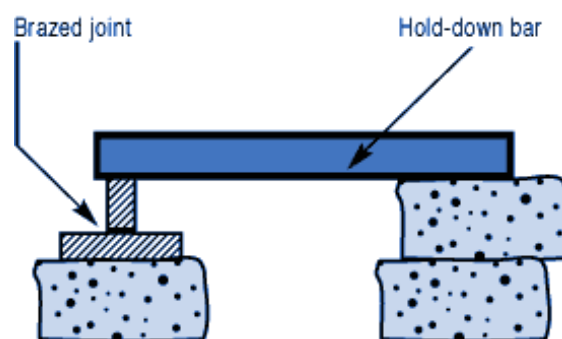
A simple braze fixture that holds a T-joint together using a dead weight.<sup>12</sup>
